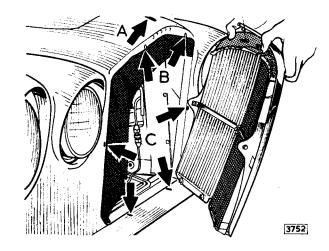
Showing the mounting points for the radiator grille (Early cars)
